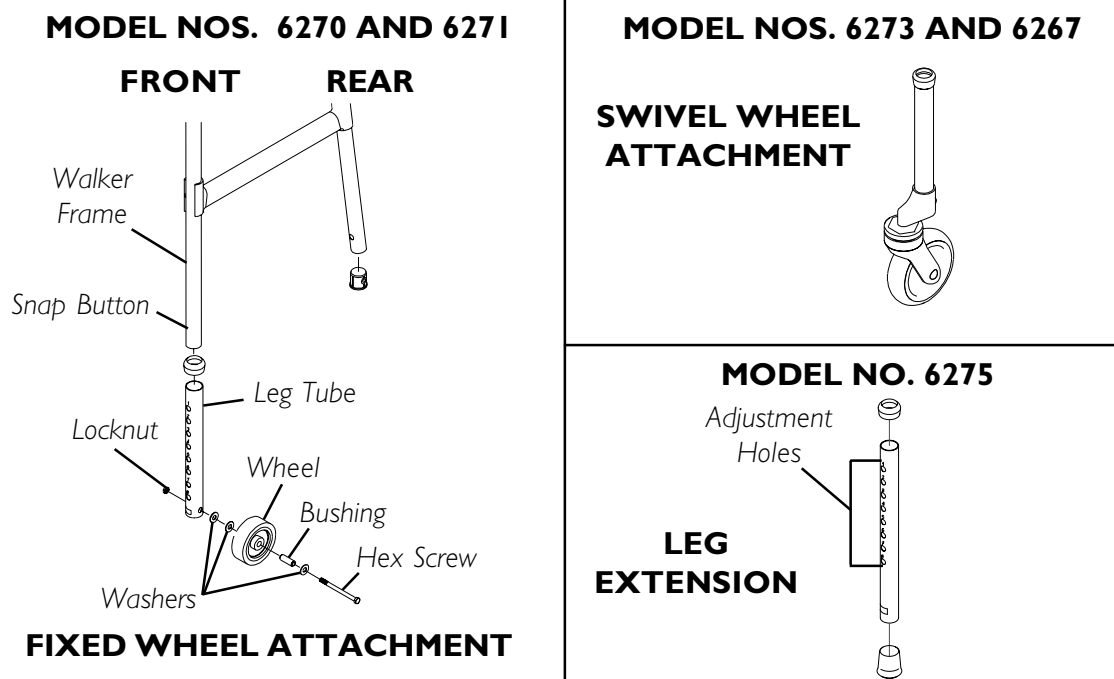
INSTALLING WHEEL ATTACHMENTS/LEG EXTENSIONS
